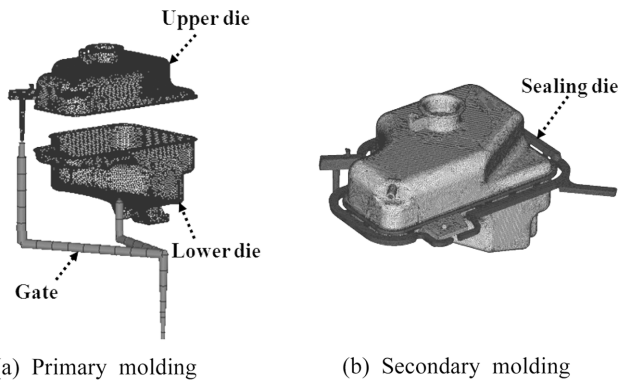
Tool layout for coolant reservoir tank injection-molding.
